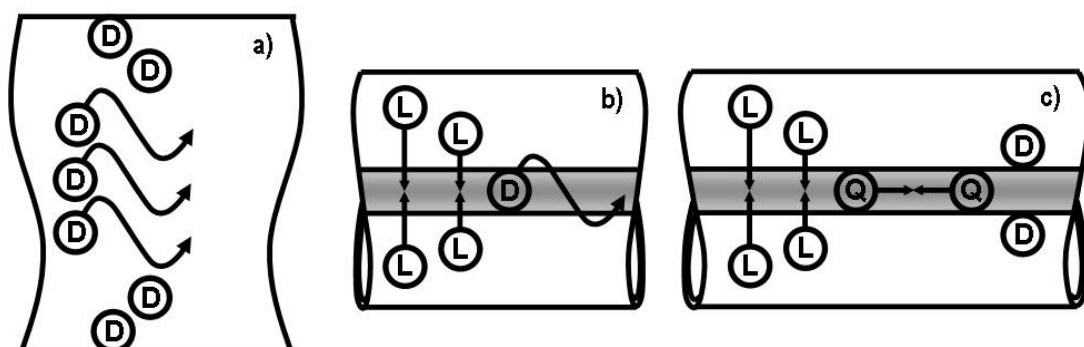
Typical Probe Configuration for ERW-pipe inspection. a) Strip inspection with edge probes and oscillating strip middle probes, b) online weld test with 4 probes for longitudinal defect detection and an oscillating deburring check, and c) offline weld inspection with 4 probes for longitudinal defect detection, 2 on-bead probes for transverse defect detection and 2 probes for lamination testing in the heat-affected zone.
